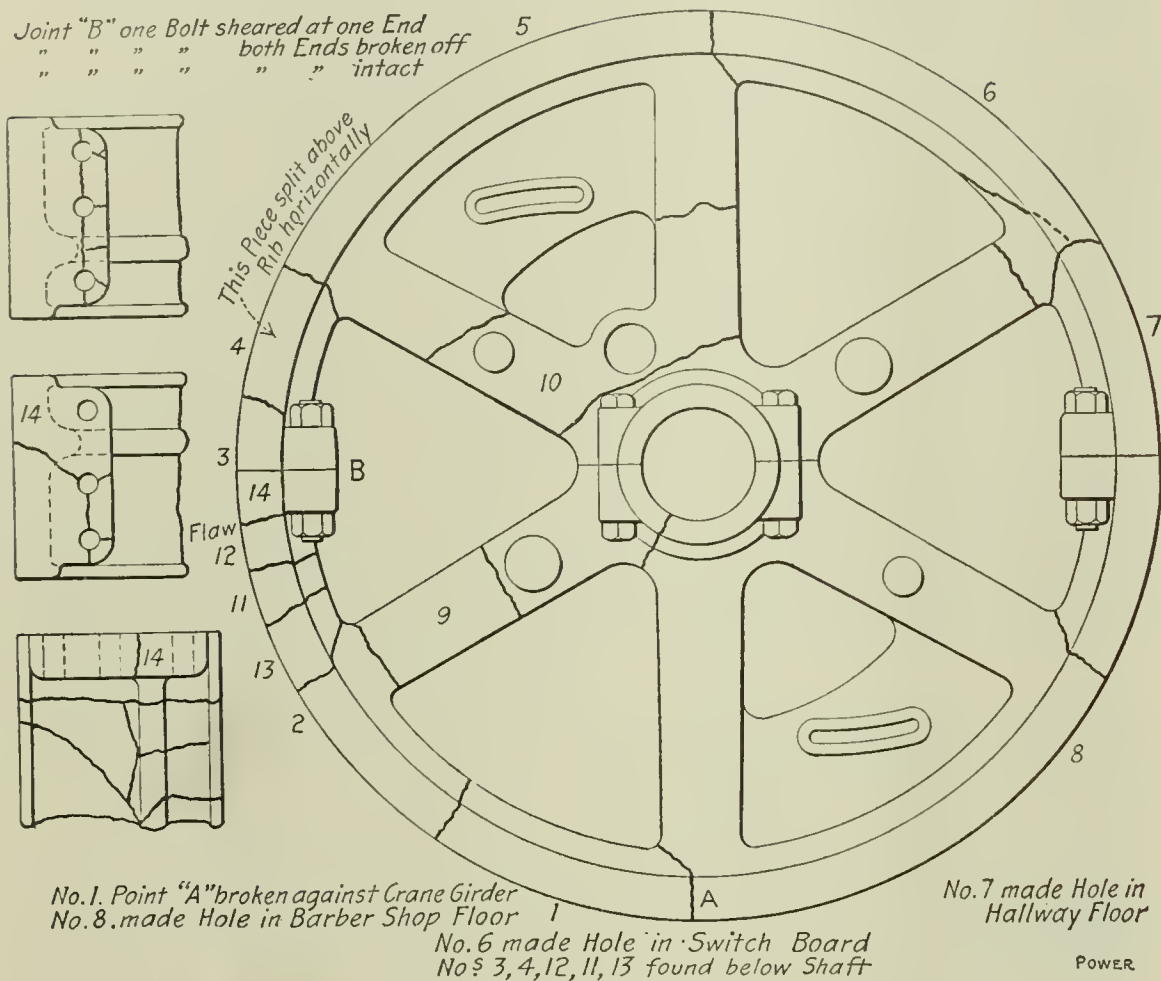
THE BROKEN WHEEL REASSEMBLED
